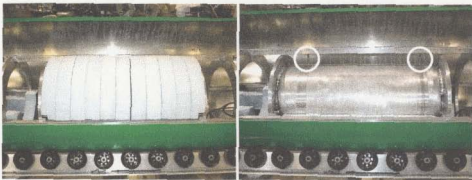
Stringer adjustment screws. Left picture shows foam and stringer in place, right picture shows foam removed for clarity.
